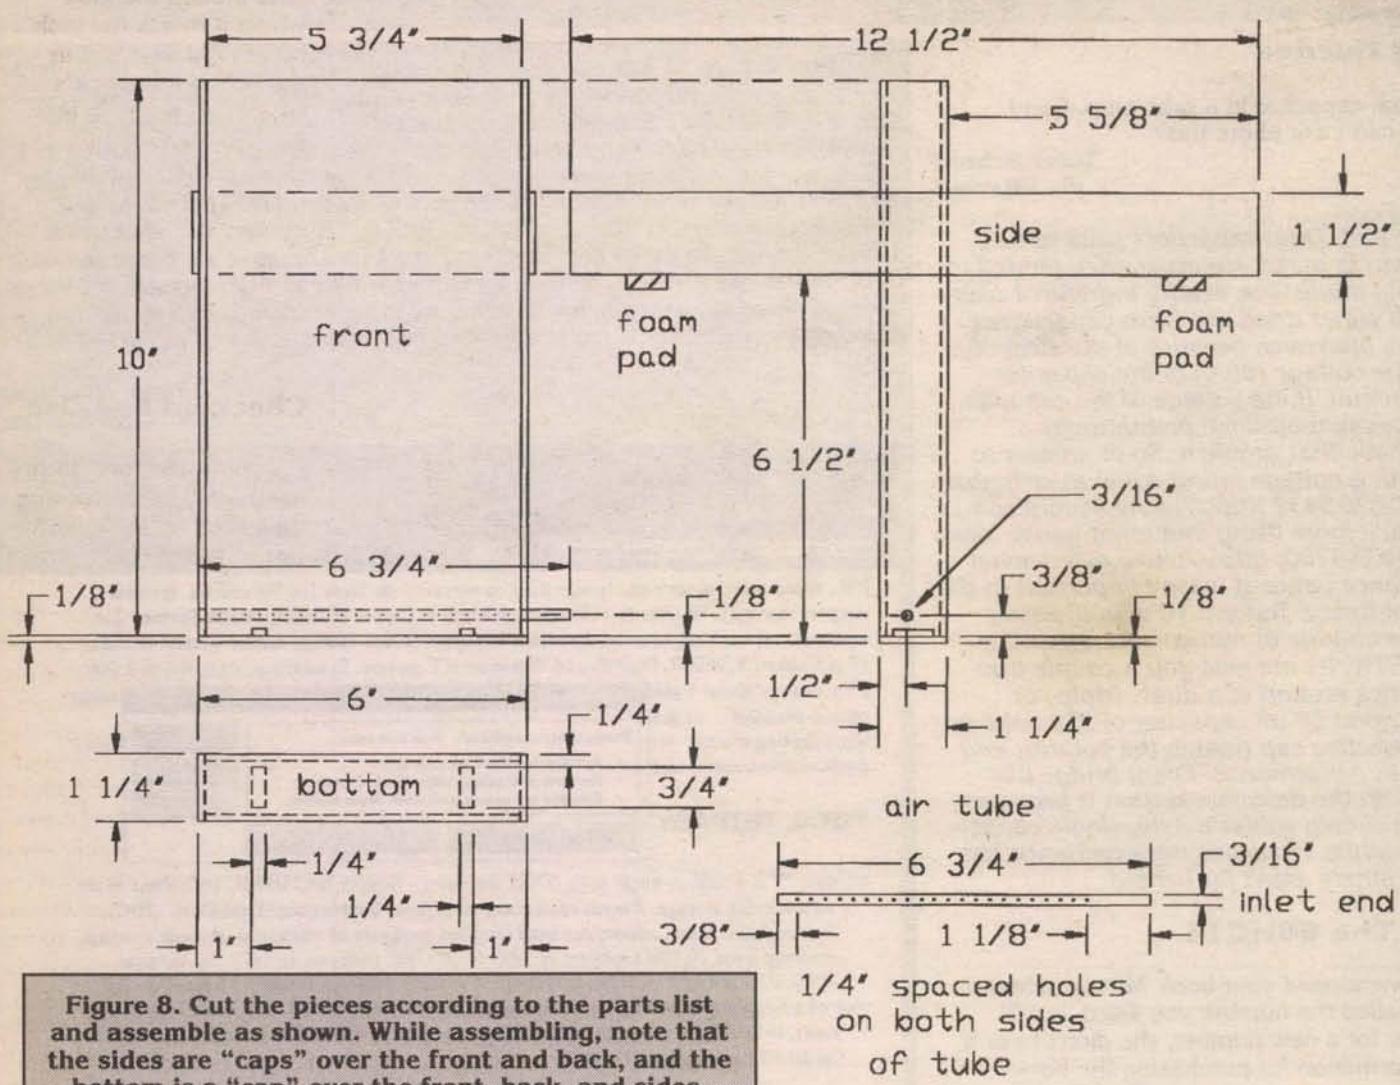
Cut the pieces according to the parts list and assemble as shown. While assembling, note that the sides are "caps" over the front and back, and the bottom is a "cap" over the front, back, and sides.
